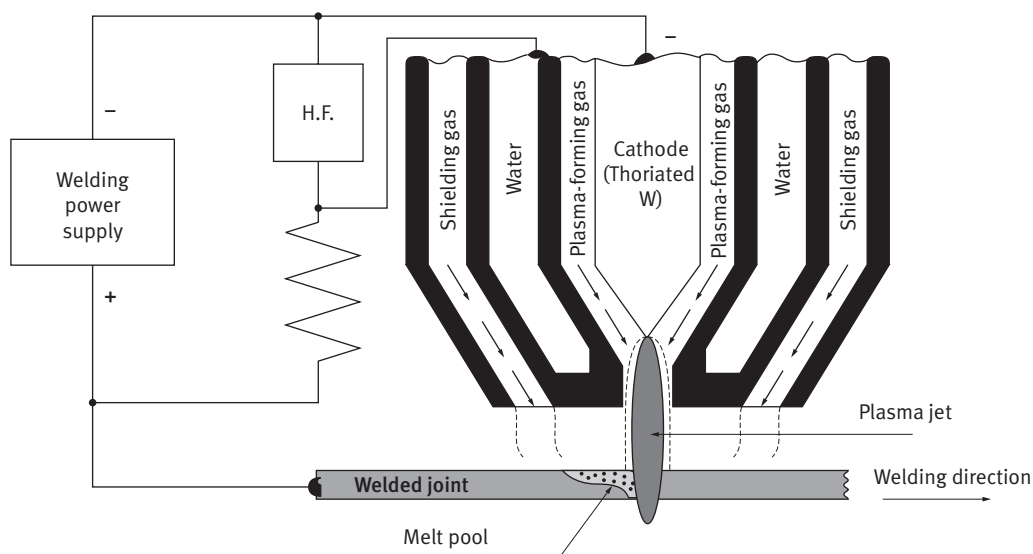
Principle of keyhole plasma welding (the jet penetrates the workpiece and emerges from the other side)
